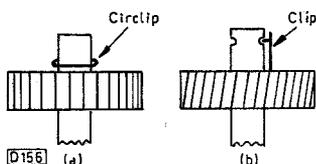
Difference between the type of gear used in the G mechanism (a) and the helical gears used in the K mechanism (b).
